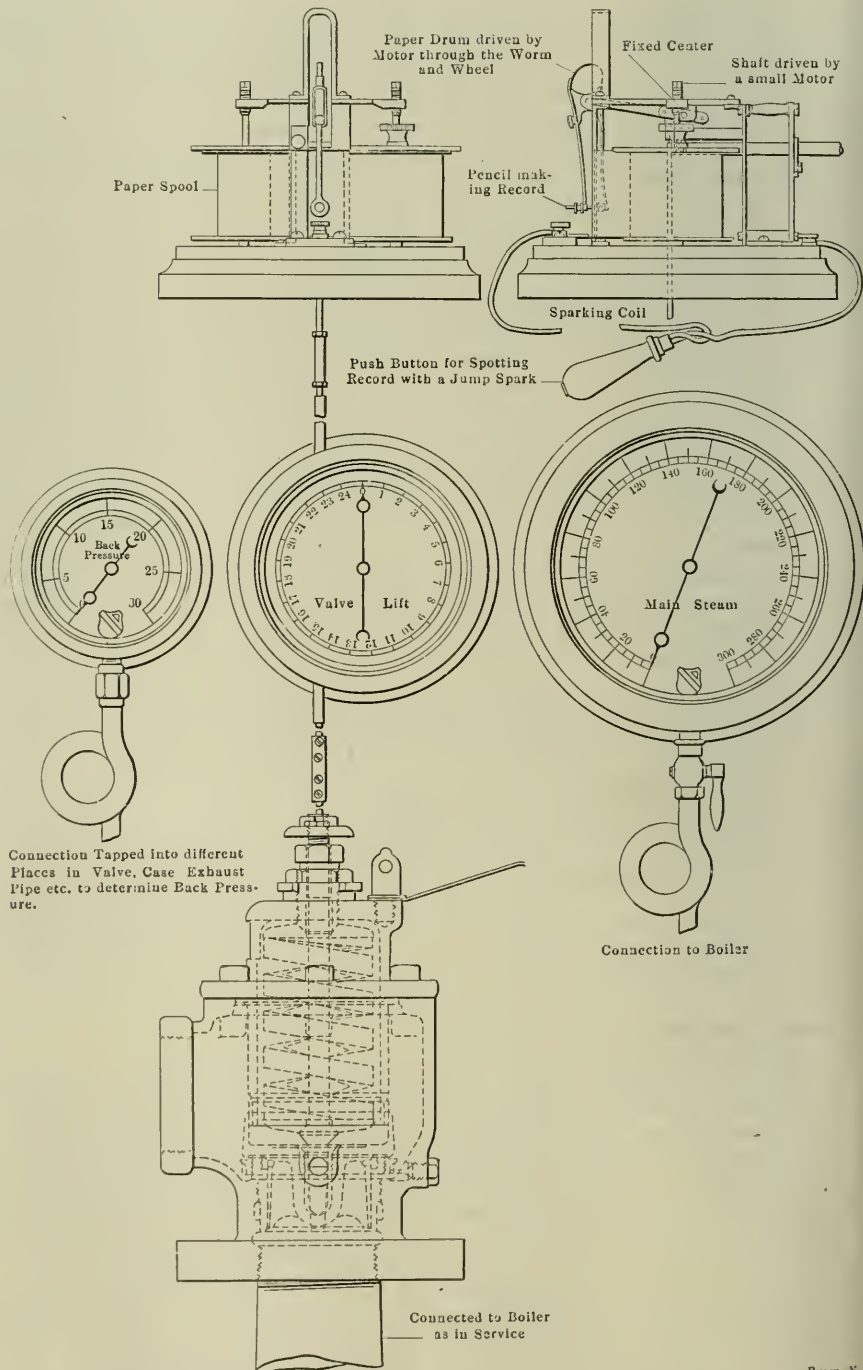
OUTLINE DRAWING OF THE SAFETY-VALVE TESTING APPARATUS
